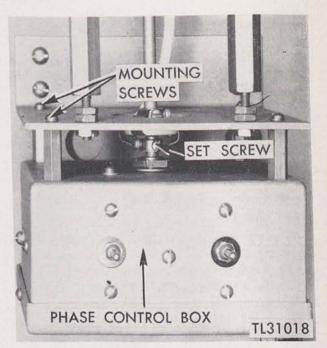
Oscilloscope BC-403-E, removal of phase control unit.
